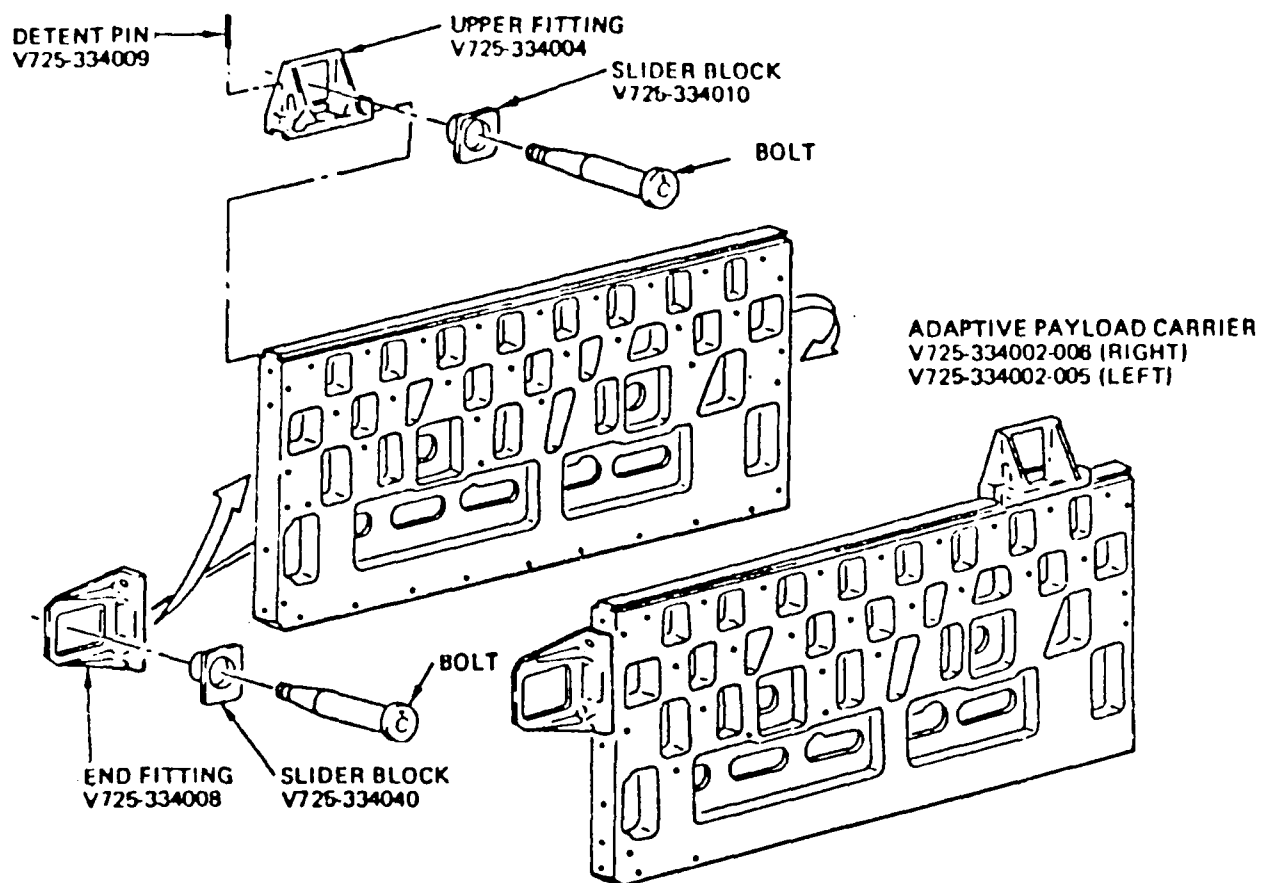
ADAPTIVE PAYLOAD CARRIER
